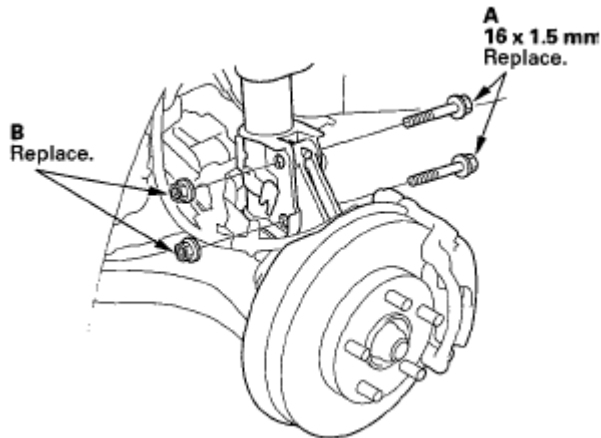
Identifying Damper Pinch Bolts And Nuts
